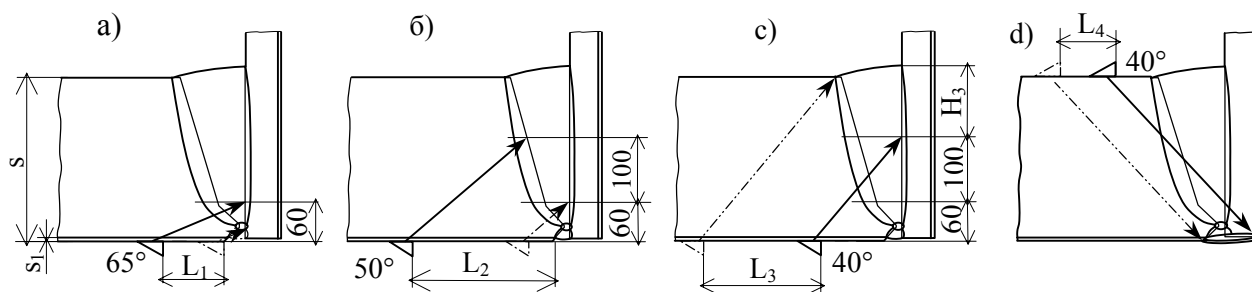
The scheme of the testing of the angular welded seam on 3 layers and buttering zone
